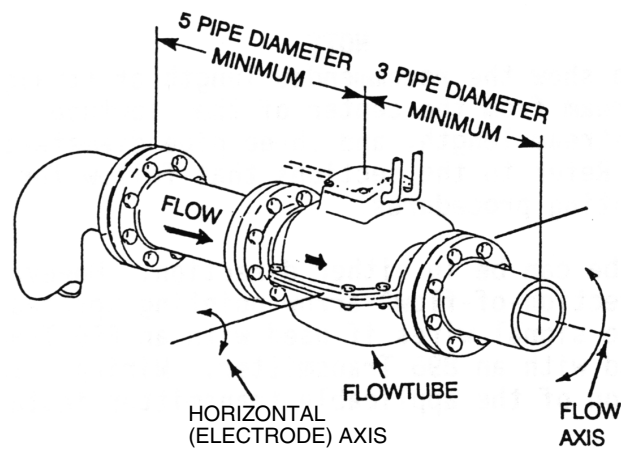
Flanged Body Flowmeter Mounted Horizontally
